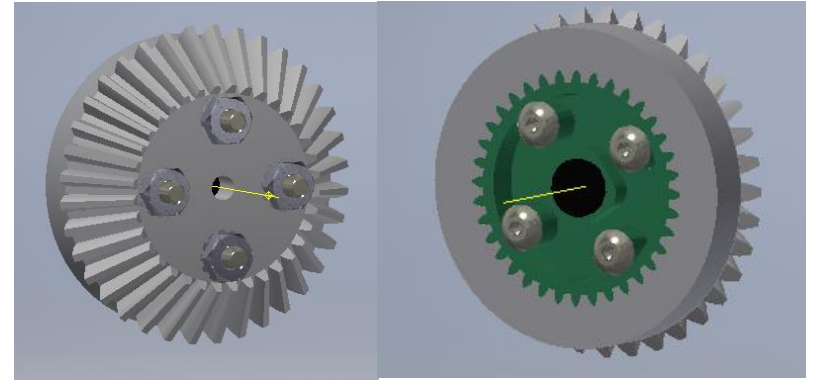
Bevel Gear adapter with the 36-tooth gear in its original position to be used with one motor.
